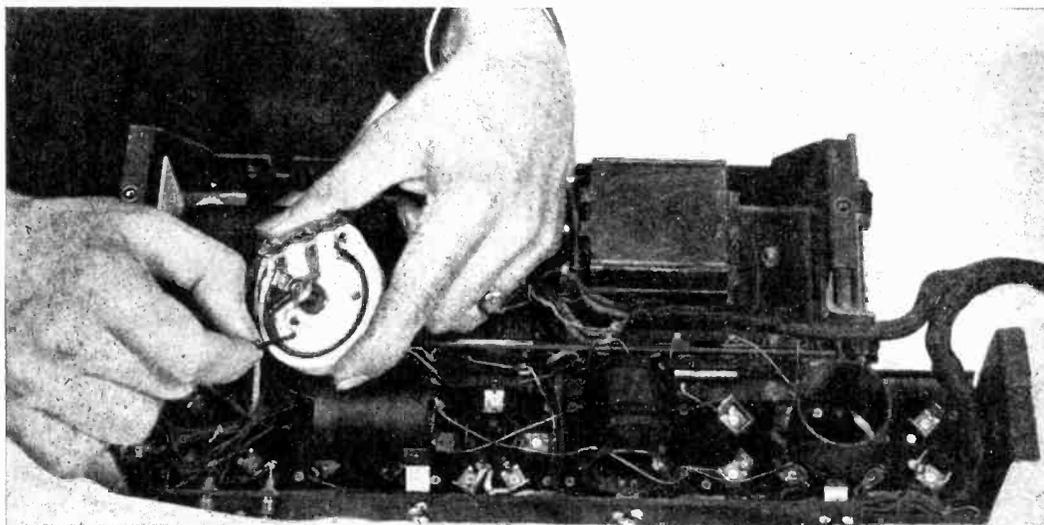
Adjusting the contact arm to secure improved contact with resistor strip.
